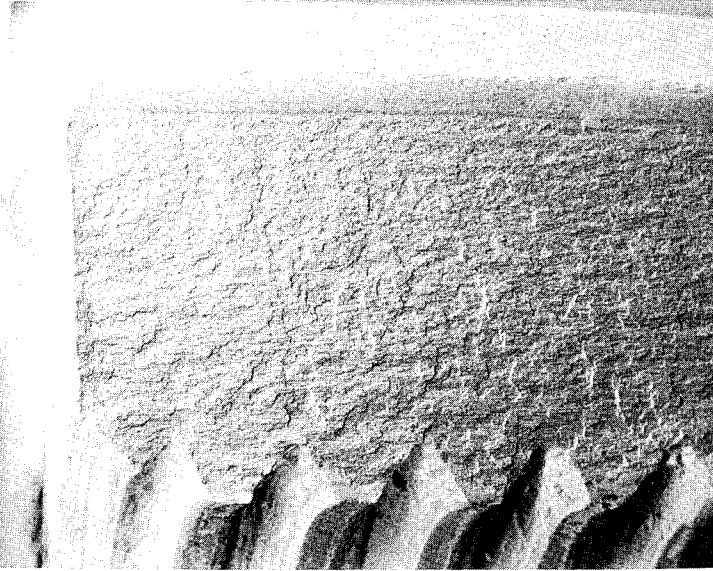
BEI fractograph showing the crack arrest marks radiating from the base of the forming seam. Mag. 12x.
